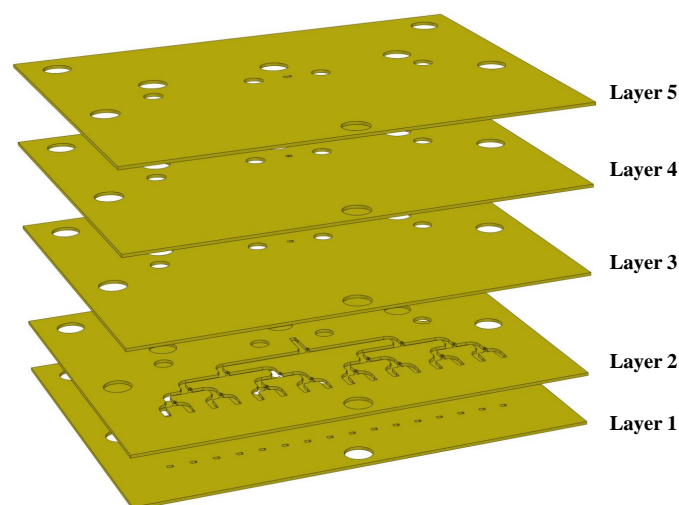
Exploded view of the five-chip stack forming the 16-way power divider.
